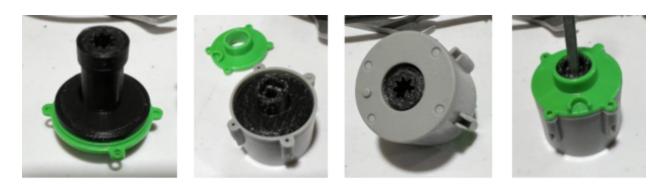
(left to right): Final stabilizer design in the motor cartridge cap, in the motor cartridge base, assembled view from bottom, assembled view from top with a drive shaft
